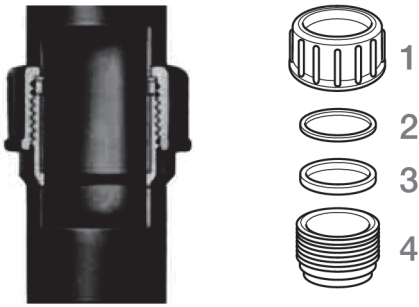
Screw-threaded joint without flange bushing (available  $\varnothing$  40–110 mm)
